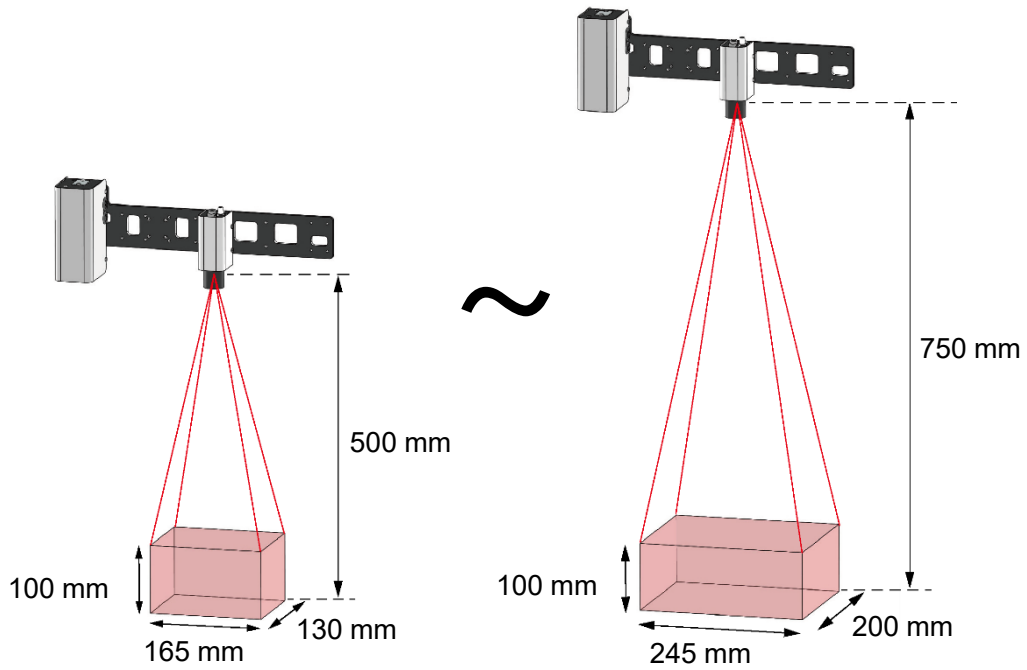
Measurement view when attaching a camera to the mounting base (large) <i> in Fig. 3-9 with a standard lens
